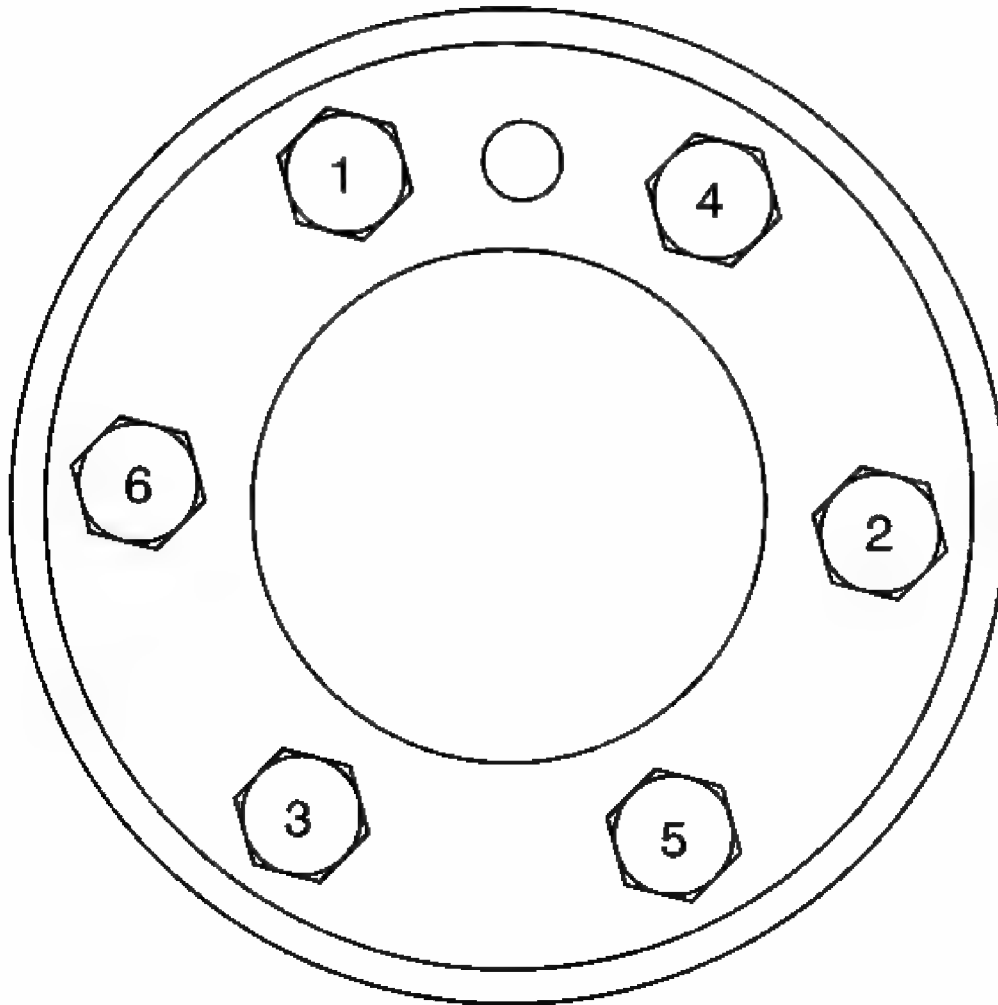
Identifying Flywheel Bolt Tightening Sequence
